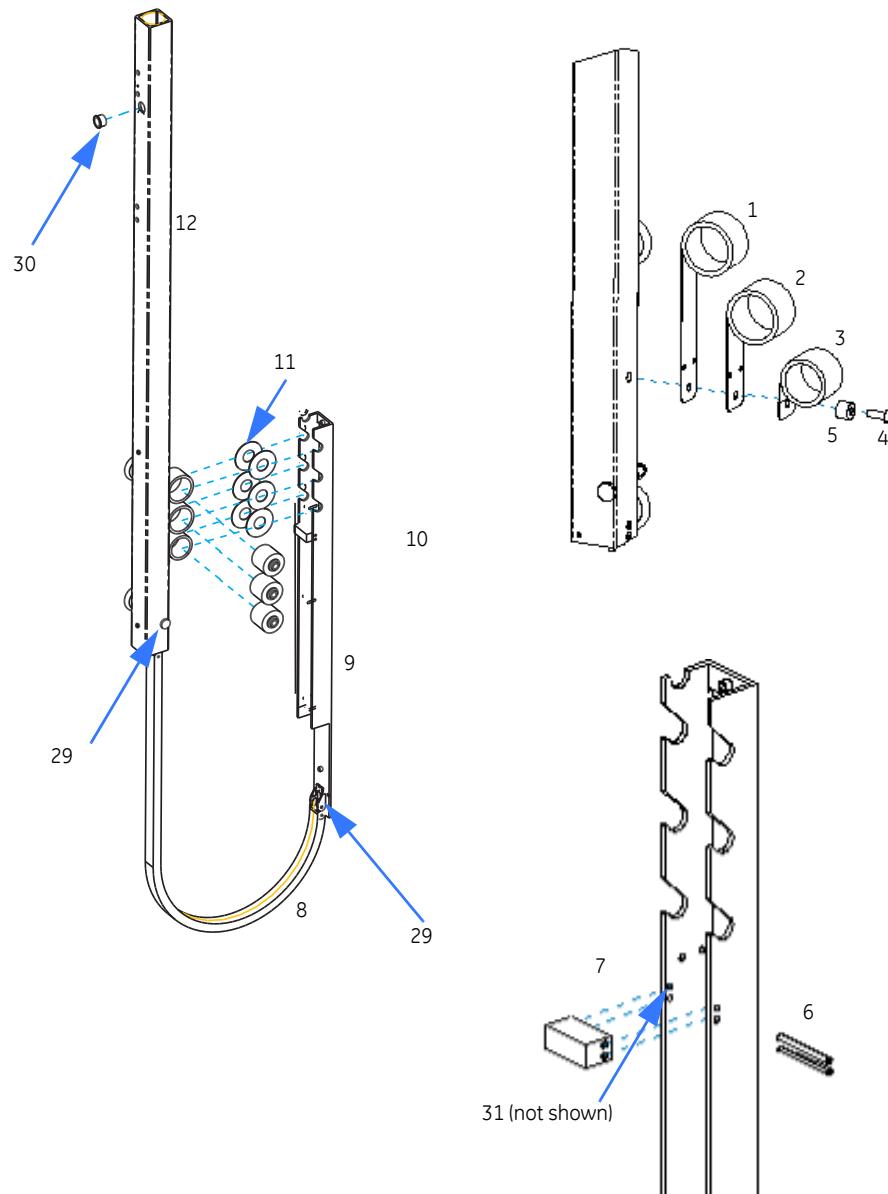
Left (West) Upright (Complete West Rail Assembly: 6600-0290-851)
